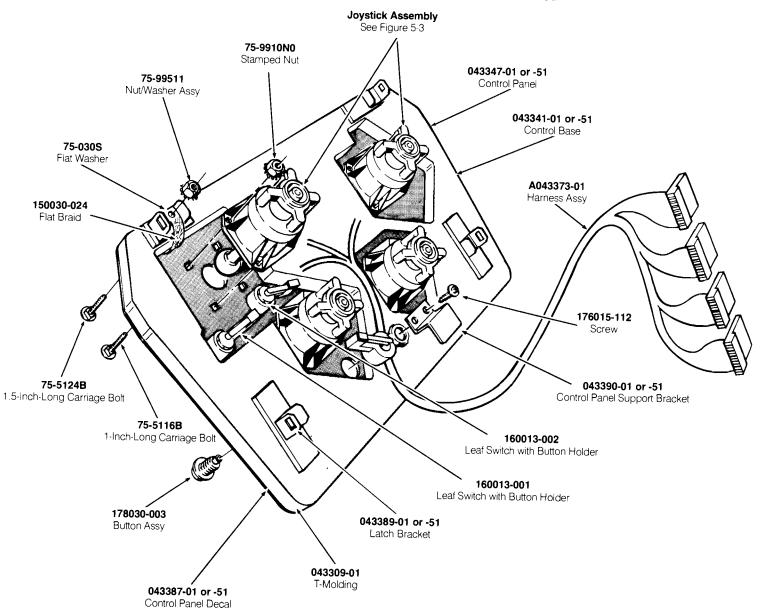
Control Panel Assembly A043386-01 B (U.S.) or A043386-51 B (Ireland)
